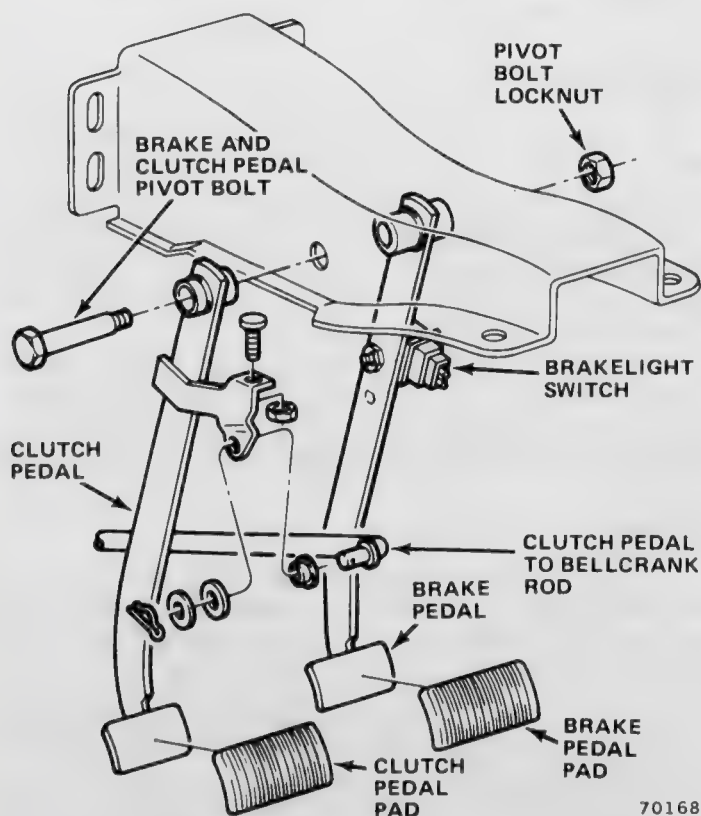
F-2 Brake and Clutch Pedals (Typical)
